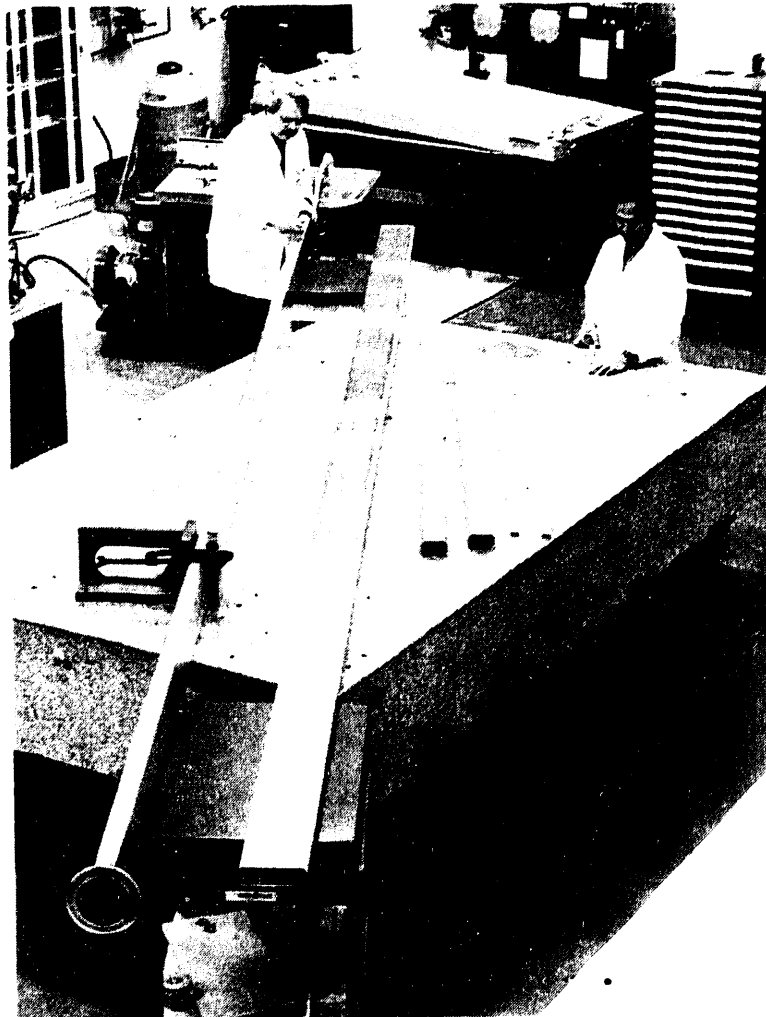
Photograph of prototype dipole chamber (long) and quadrupole chamber (short) extrusions being dimensionally inspected at SLAC.
